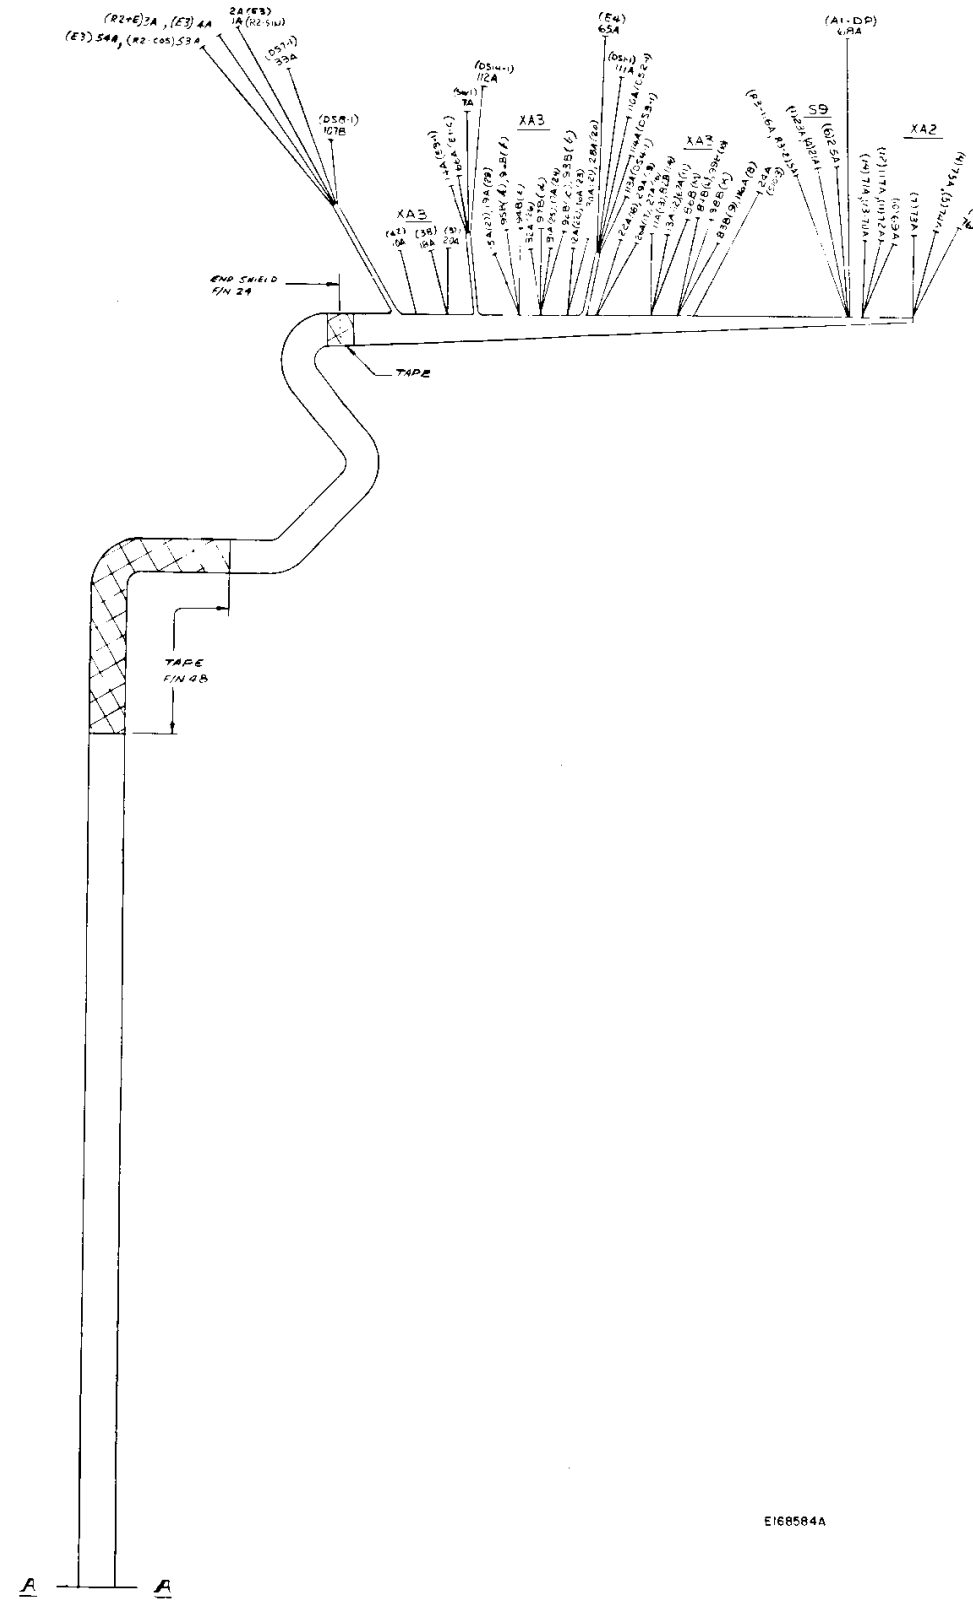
Headset Main Harness Assembly Drawing (Sheet 2 of 2)
